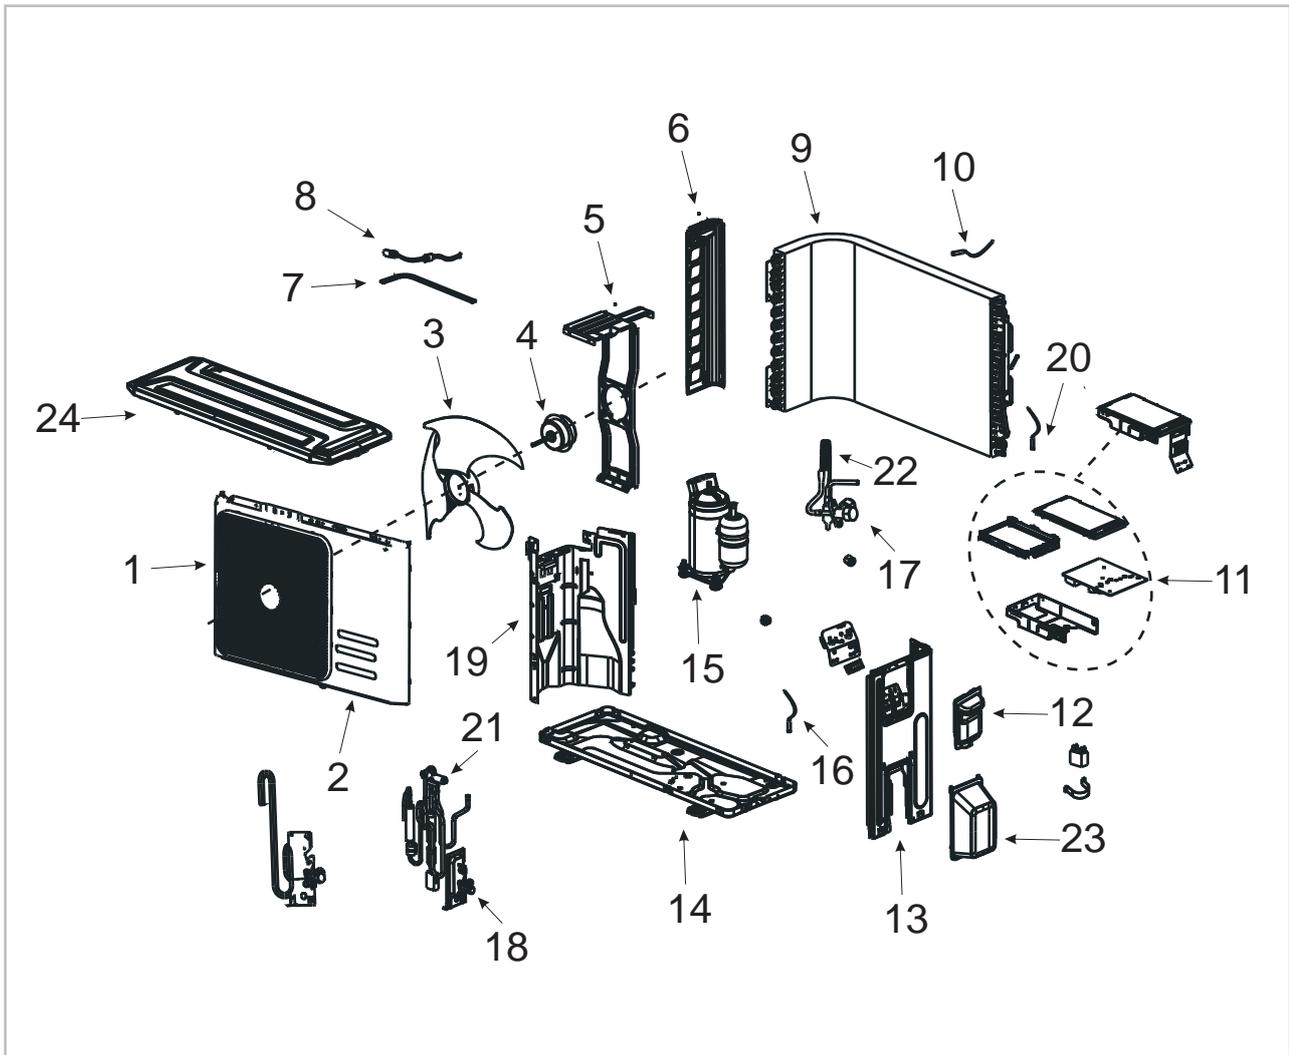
Exploded view of the unit RVT 265-355 DC AT
